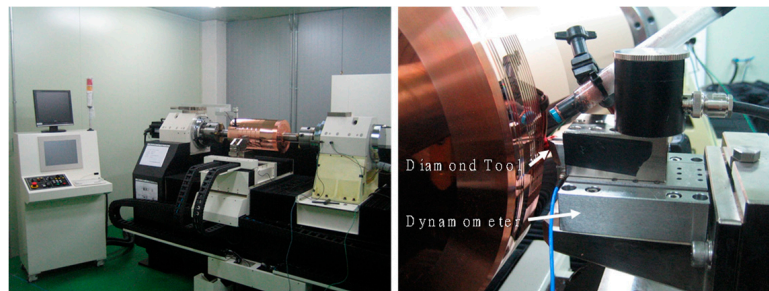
Precision machine tool (4-axis with air bearing) and experimental setup (run-out correction using the indicator and height correction using a jig).
